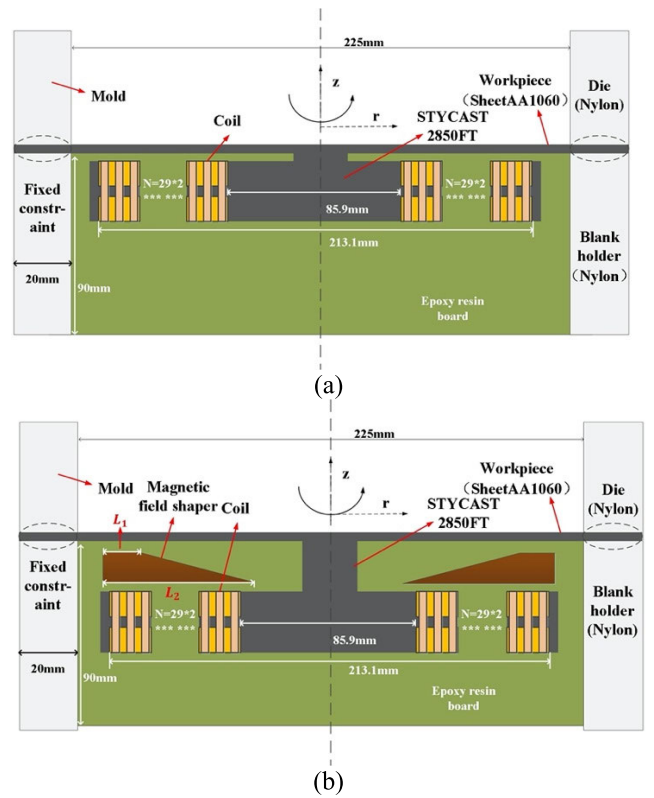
Sheet forming dimension drawing: (a) traditional sheet forming; (b) forming of new magnetic field shaper sheet.
